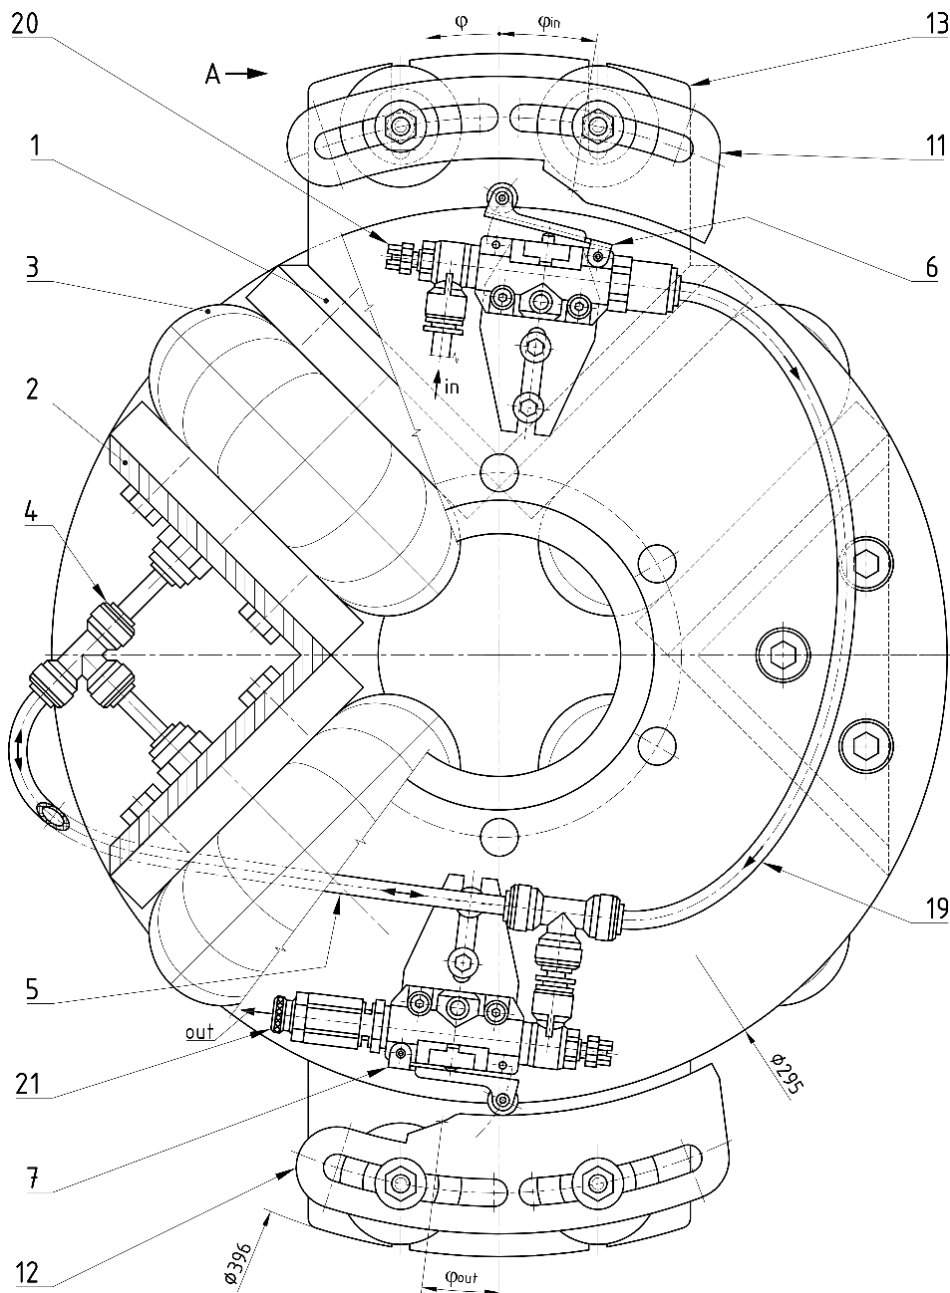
Pneumatic flexible shaft coupling with mechanical constant twist angle regulator
